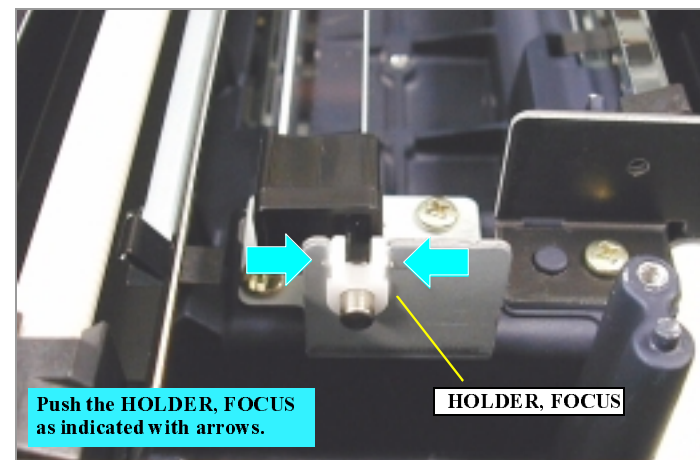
“GLASS ASSEMBLY, FOCUS” Removal (2)
